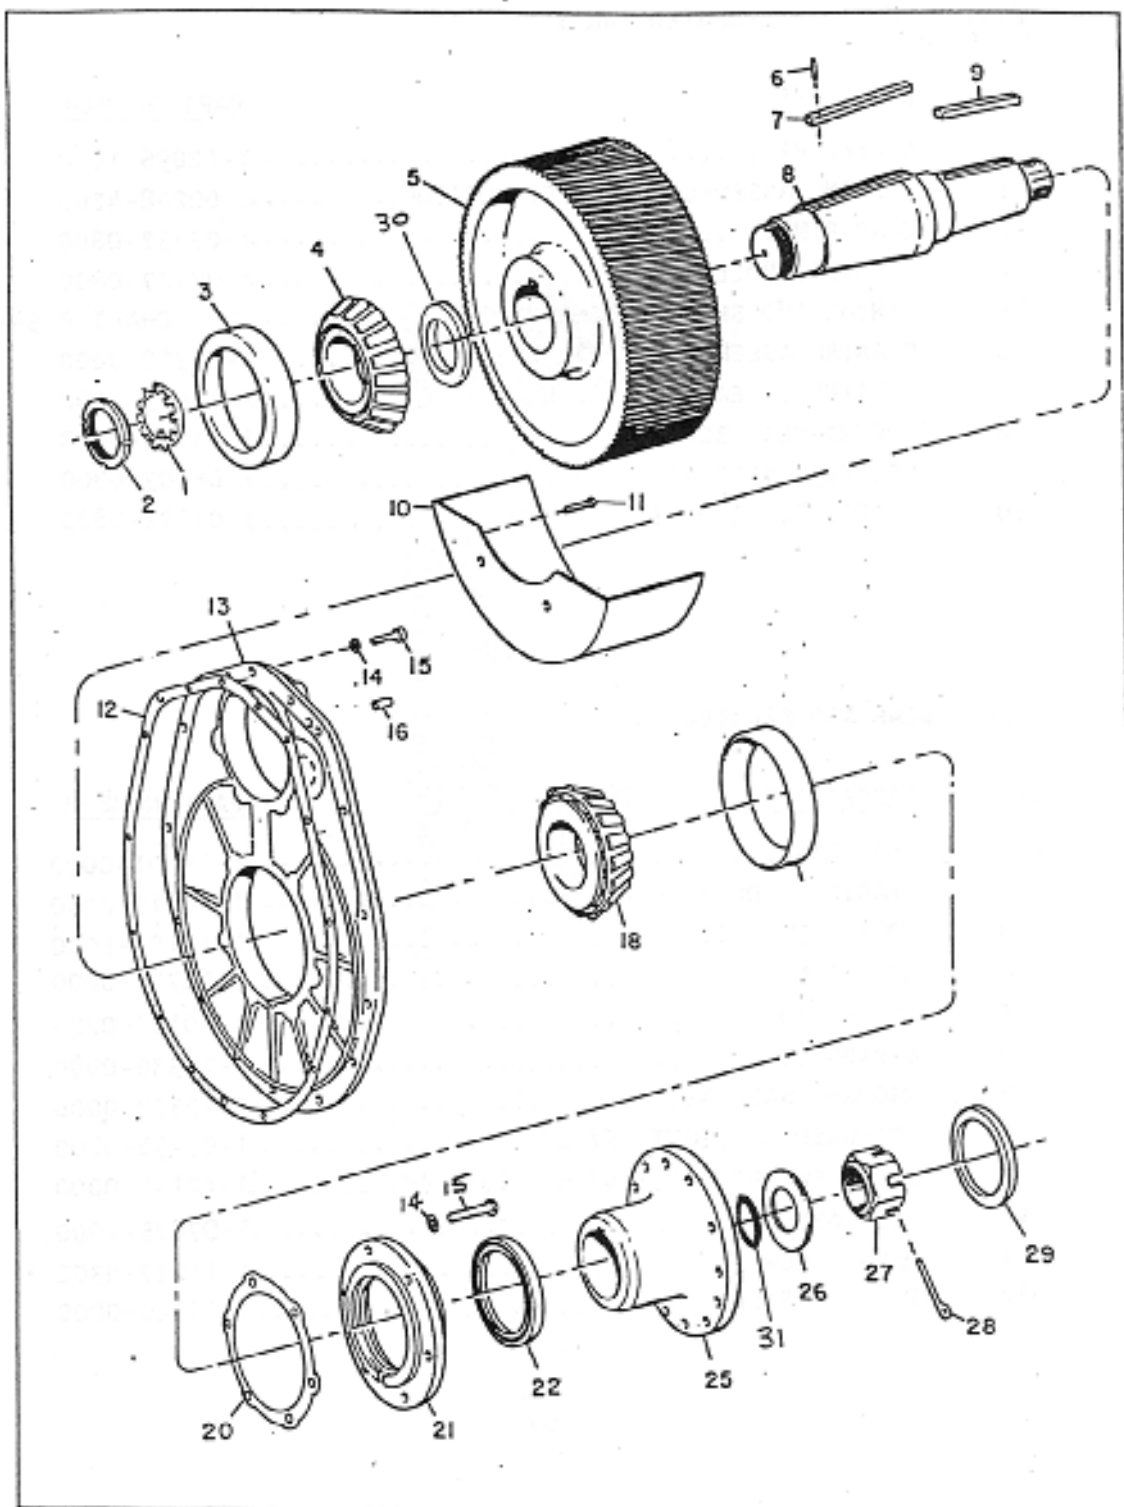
OUTPUT GEAR AND RELATED PARTS HY-6900
